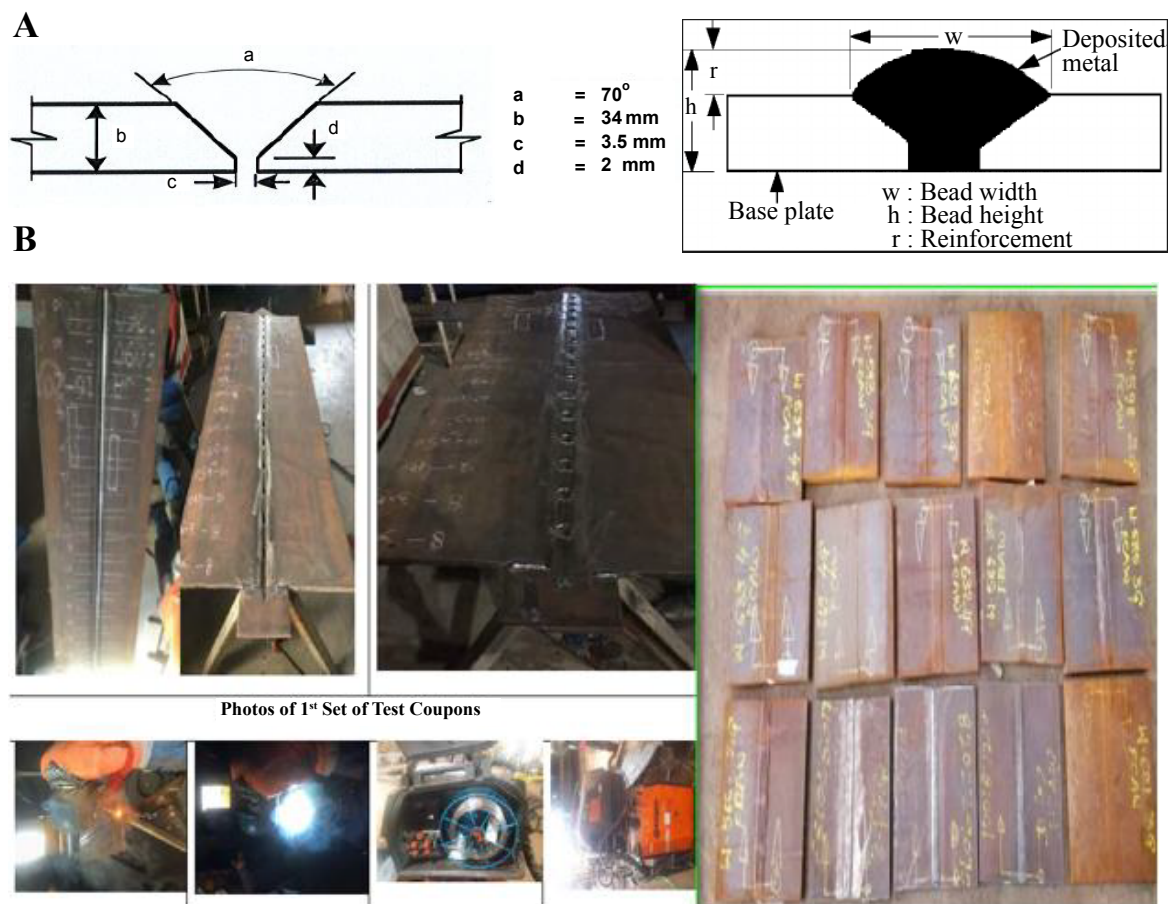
(a) Joint design detail used for FCAW welding. (b) Test coupon welded to get the data matrix as per CCD of RSM.
